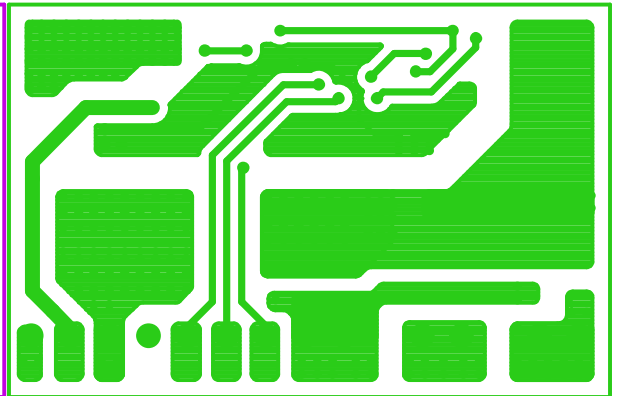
Daughterboard PCB layout - 4 Layer FR4 (bottom side)
